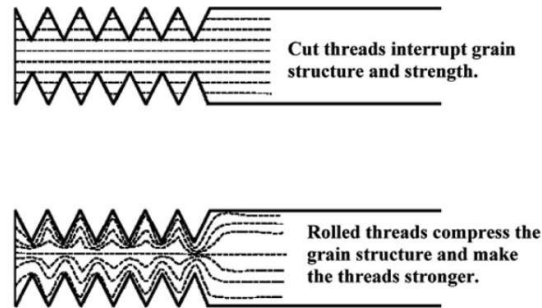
Rolled threads on the shaft vs Thread cutting (Books, 2015)
